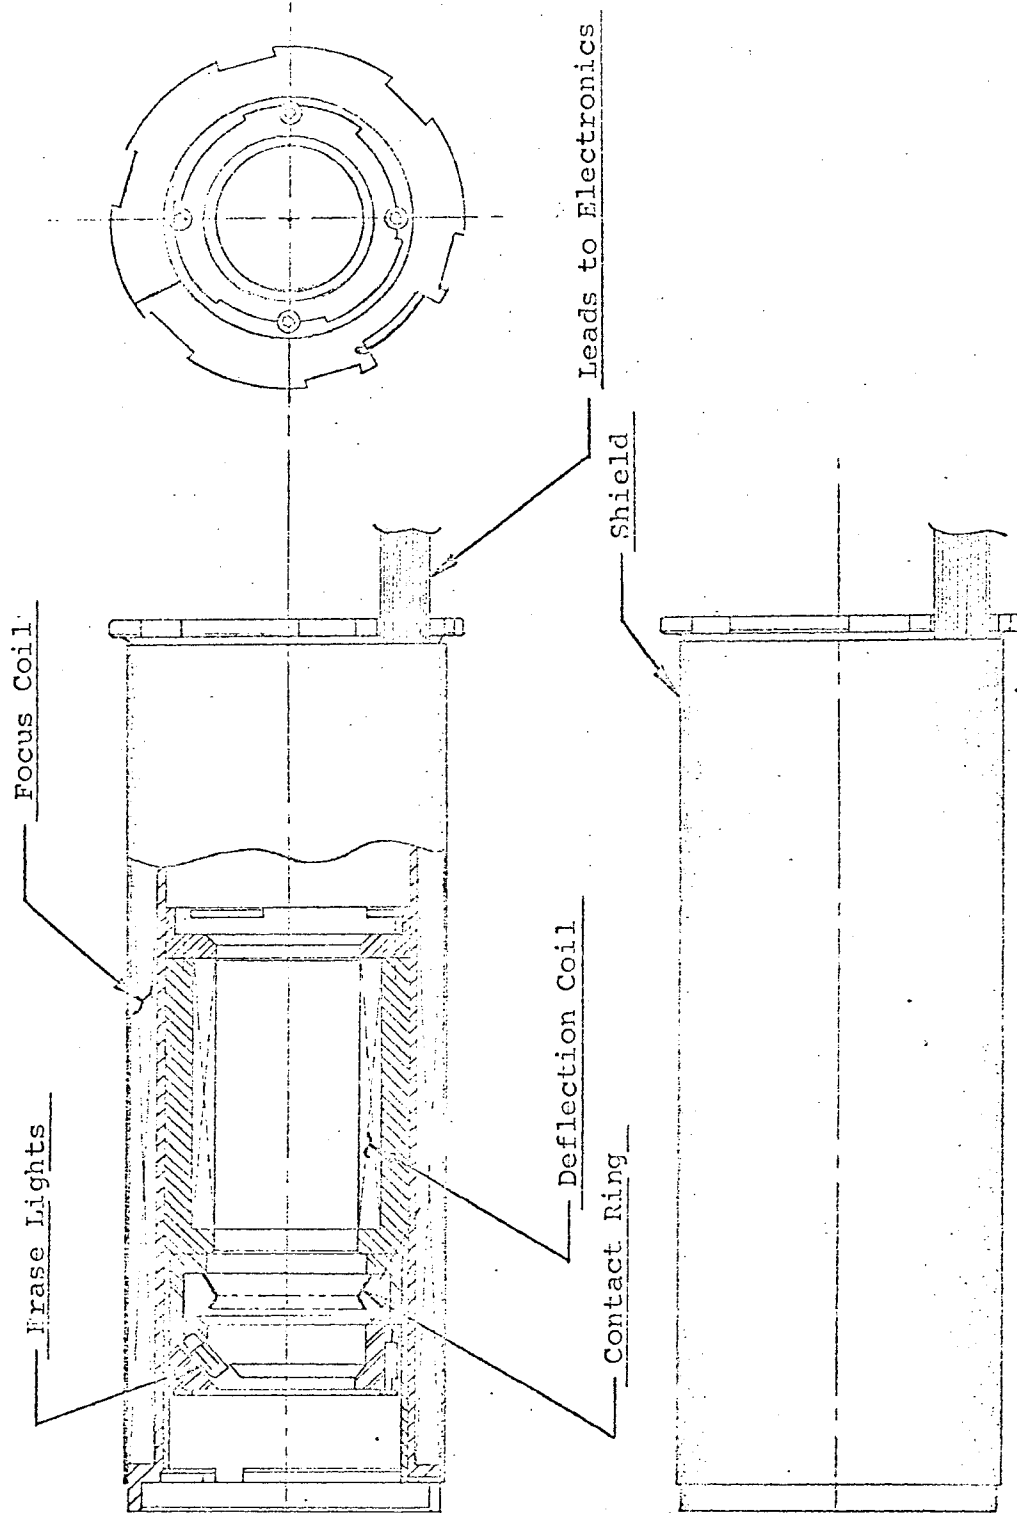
Subassembly of Erase Lights, Focus Coil, Deflection Coil, Contact Ring and Shield
